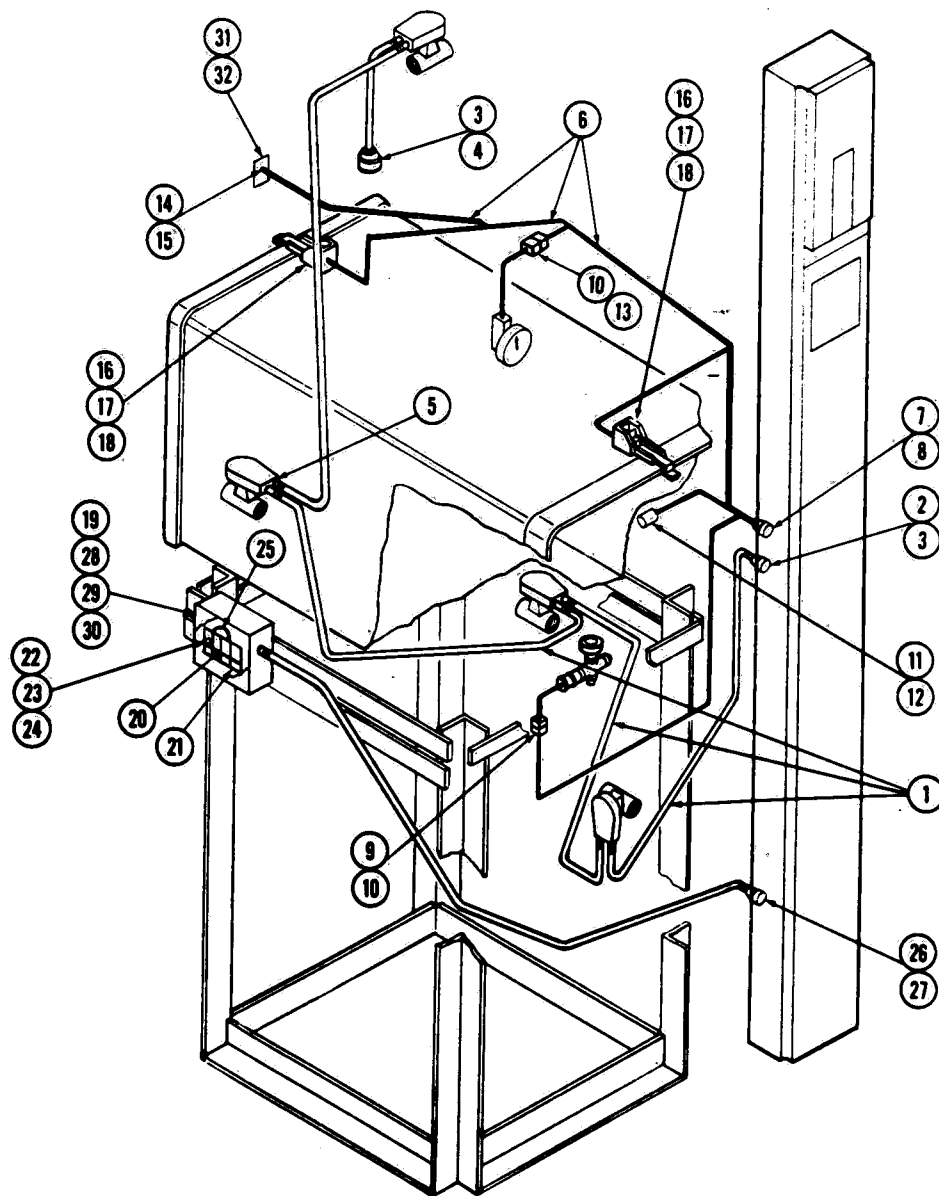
A. WIRING ASSEMBLY - Gravity (Units built before 12/89)
